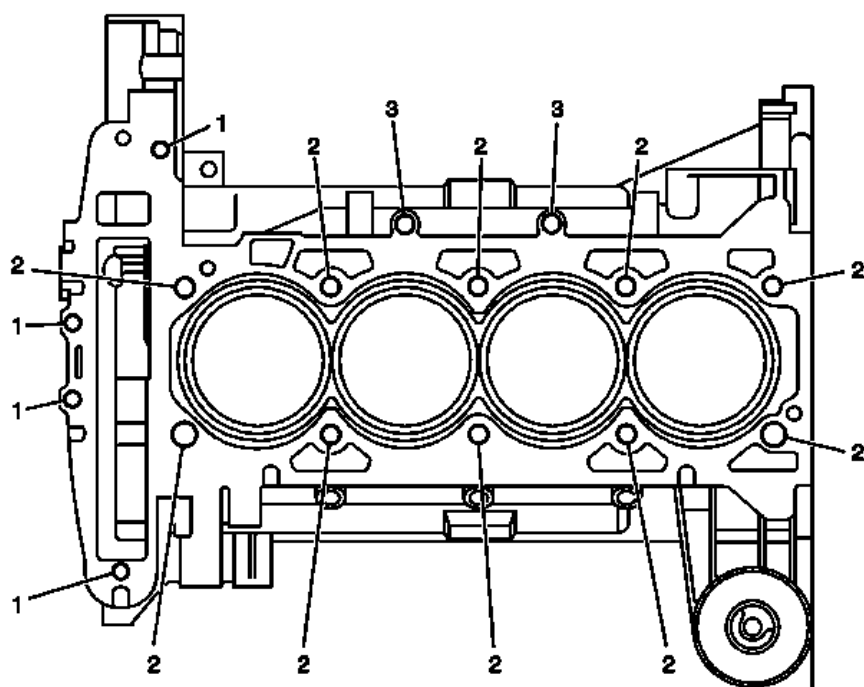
Identifying Bolt Size & Locations On Engine Block - Top
